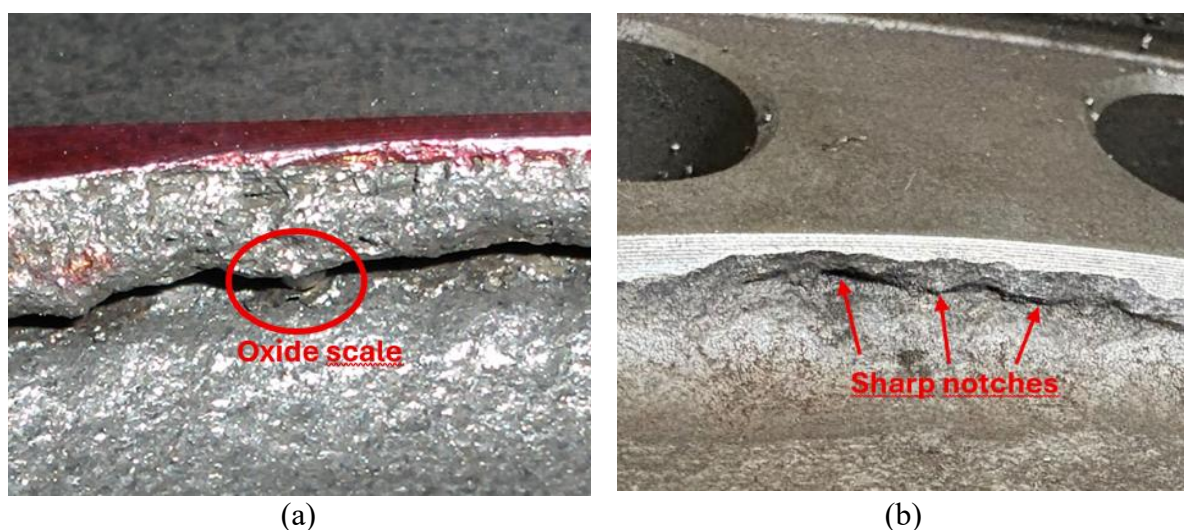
Detail from a visual inspection of initial cracks on the surface:
